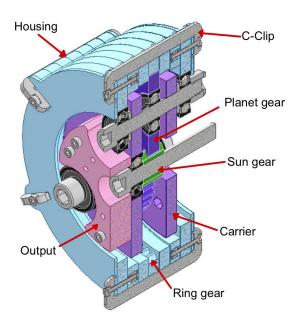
Labeled section view of laser-cut gearbox CAD showing the housing (light teal), clamps(gray, outer), sun (green) and planet gears (dark purple), carrier plates (light purple), output assembly (pink), bolts, and bearings.
